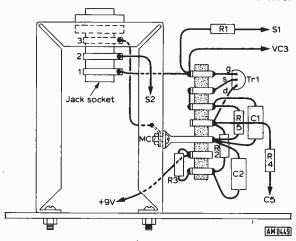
The mounting for the rotating aerial, and the tag strip that holds the RF stage, is constructed from a Universal chassis flanged runner and bent to fit.
